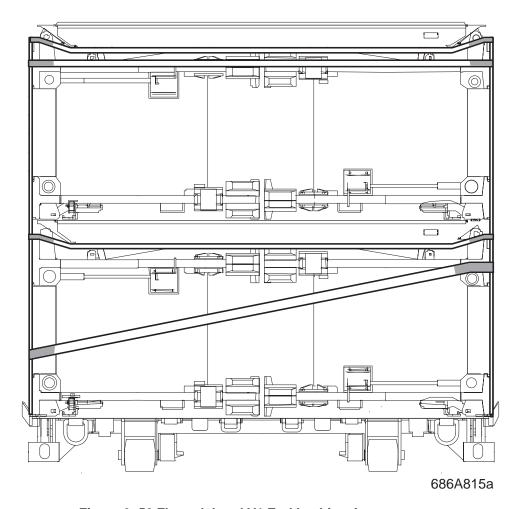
58 Flatrack Load V1 End Lashing Arrangements
